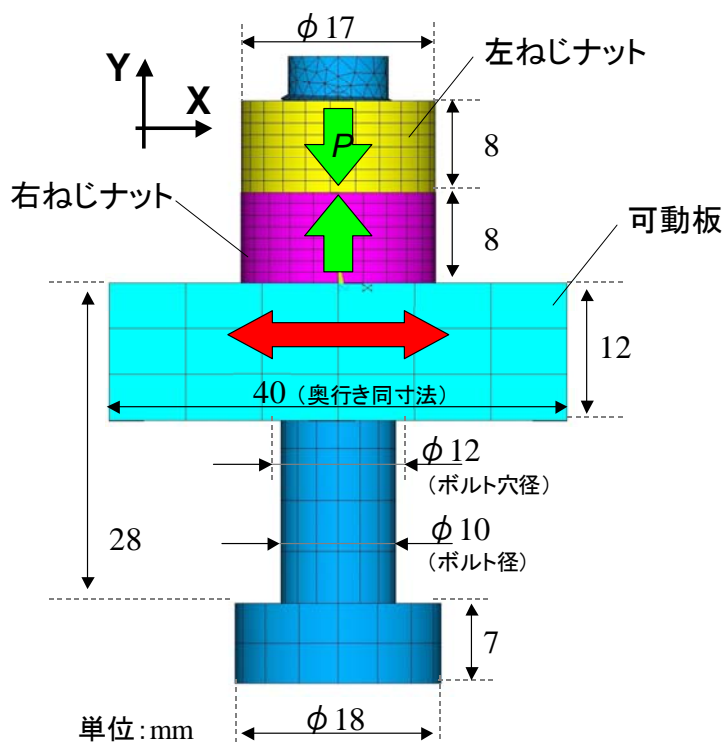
Dimension of bolt, nuts, and moving plate.
